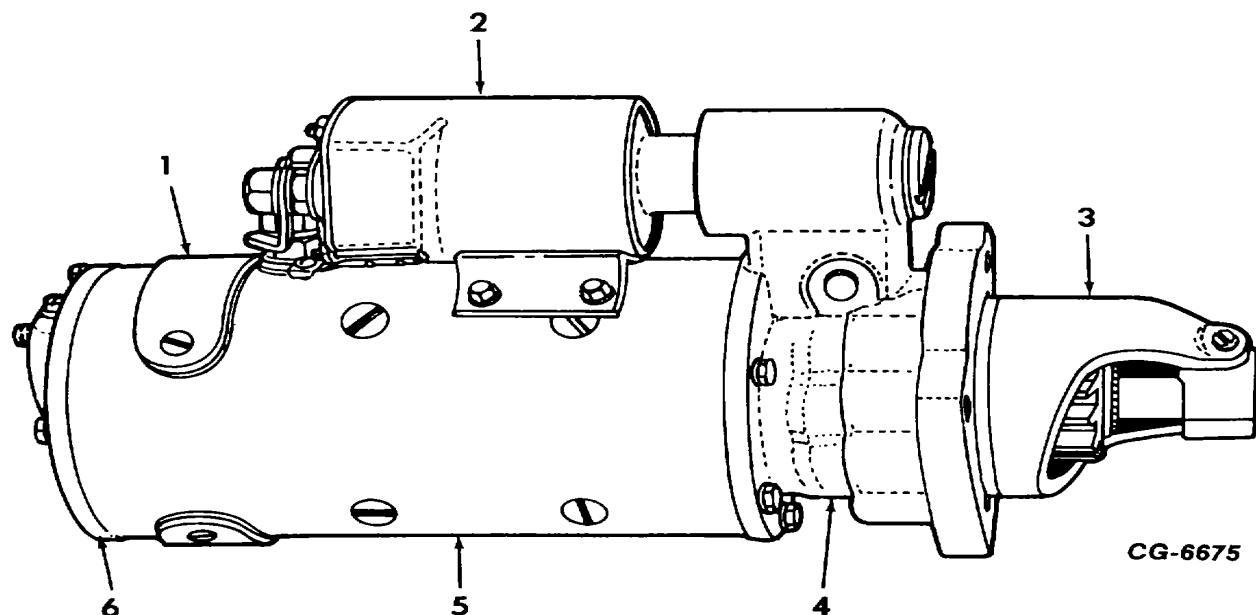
Heavy Duty Starting Motor with Enclosed Shift
